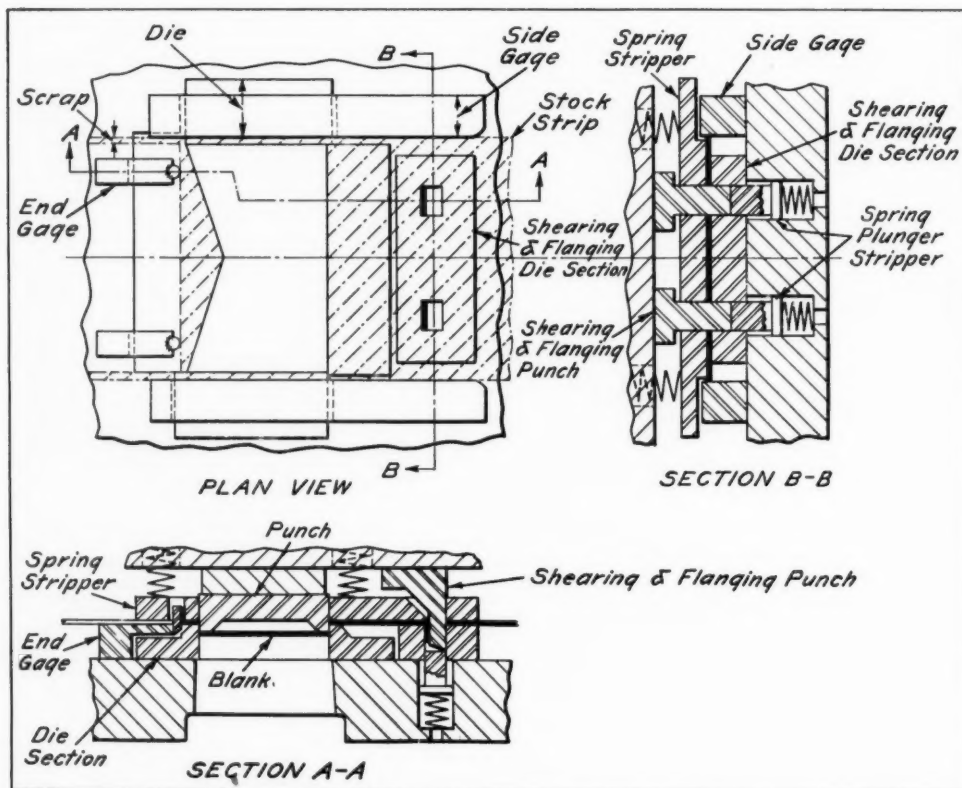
Die for Shearing, Forming Tabs, and Blanking
